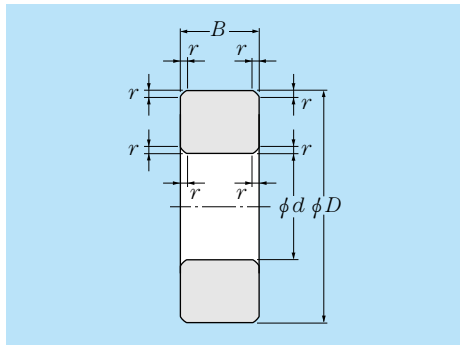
Radial bearings (excluding tapered roller bearings)
